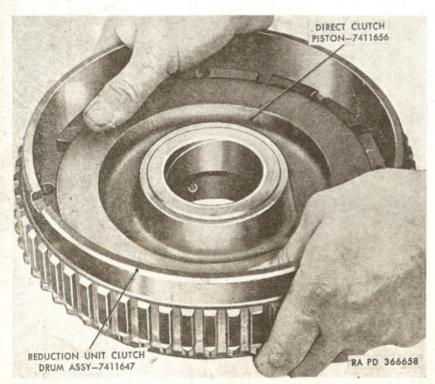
Installing direct clutch piston assembly in reduction unit clutch drum (303M).
